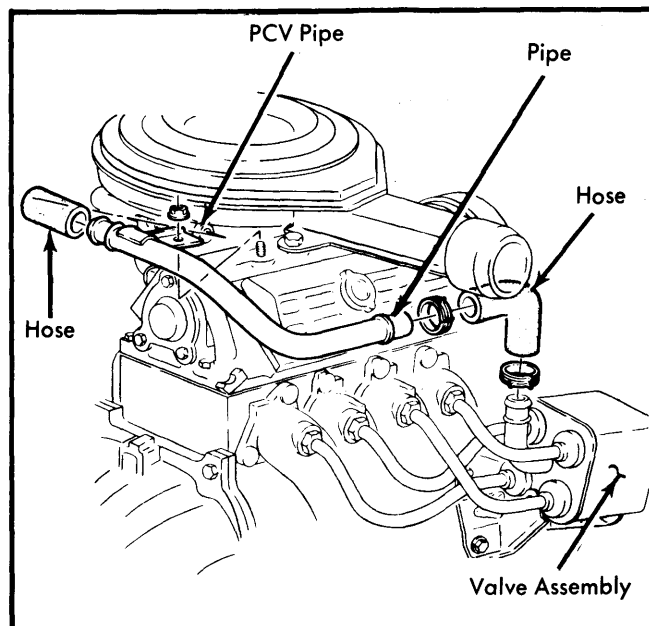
Showing Typical Installation of PAIR Valve Pipe and Hose (Chevette Shown; Others Similar)
